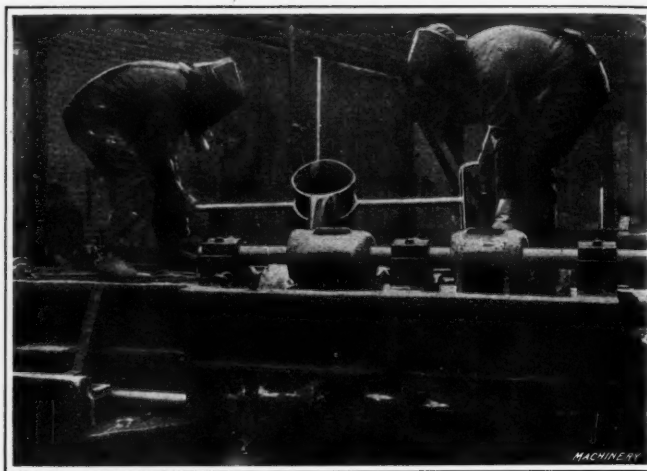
Pouring Clamping Metal. Attention is called to Arrangement of Clay to hold Molten Metal in Place until it solidifies
